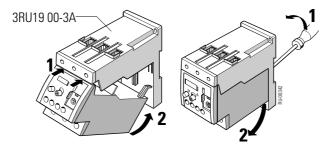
Mounting and removal of the adapter for individual installation (S2)
